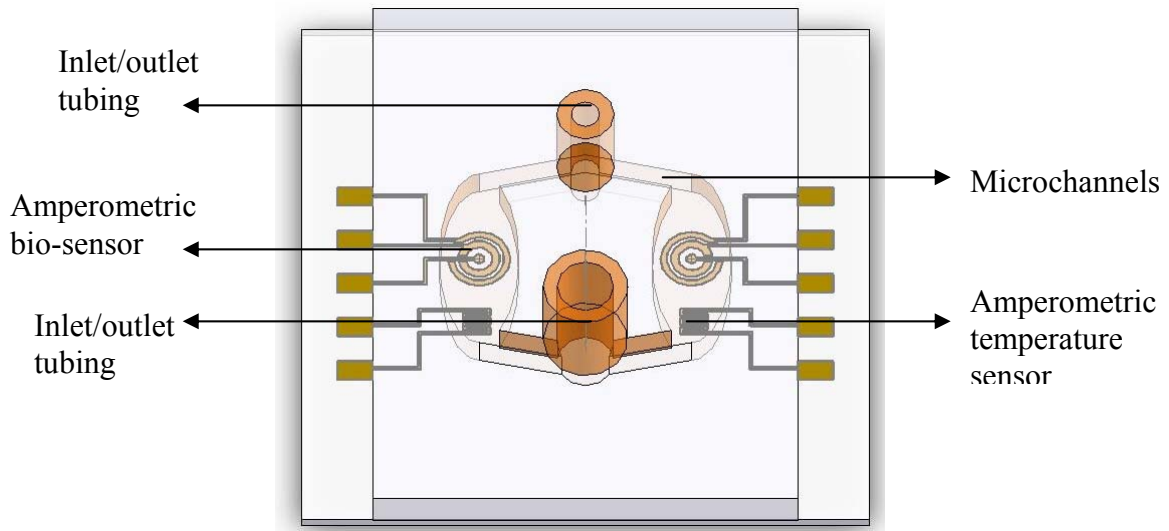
Isometric view 3D model from Solidworks - Package assembled with sensor chip
